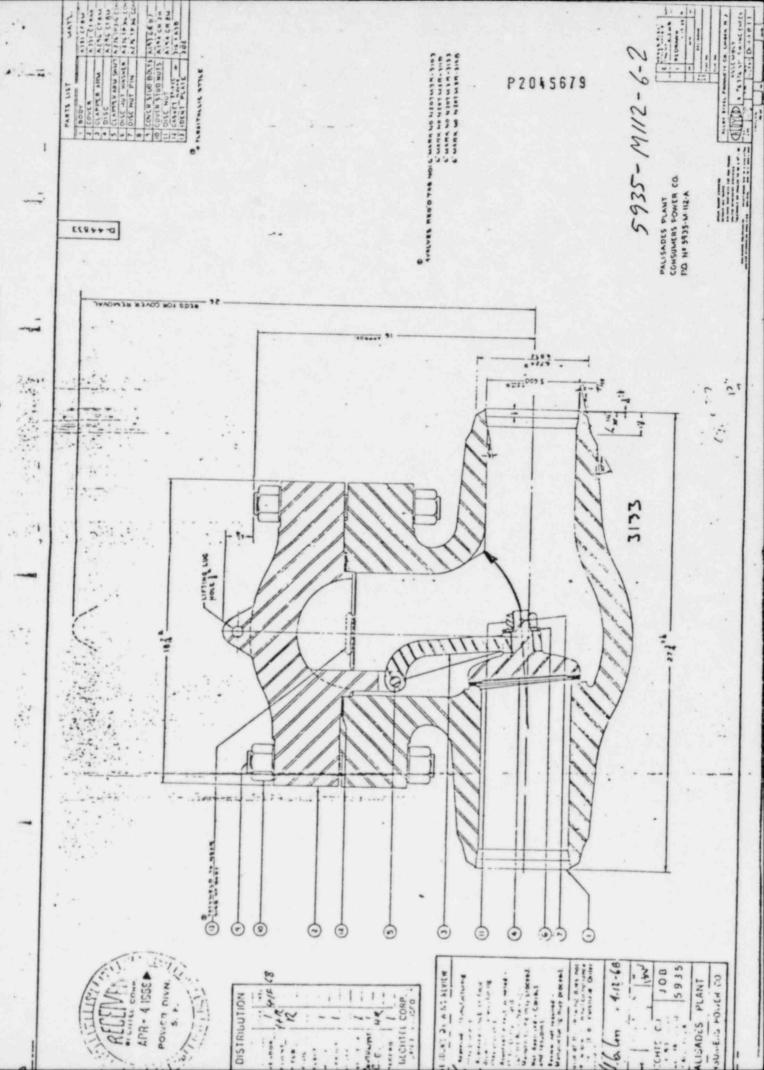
Cross Section of a Typical Swing Check Valve (Powell) Showing
